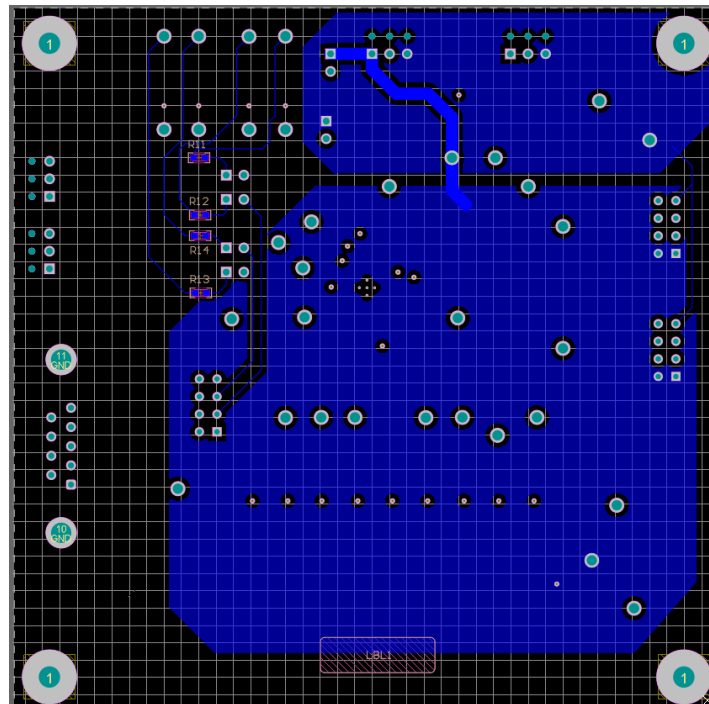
Bottom Layer of PCB Layout - THVD4411EVM
